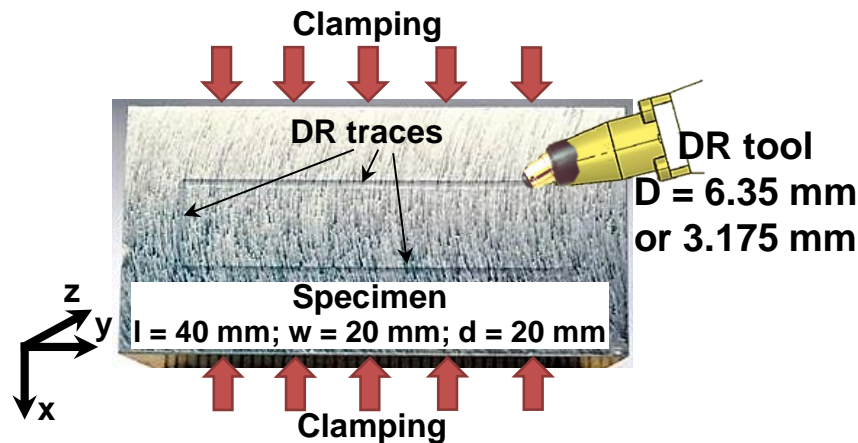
Exemplary picture of the DR setup and the specimen's fixture
